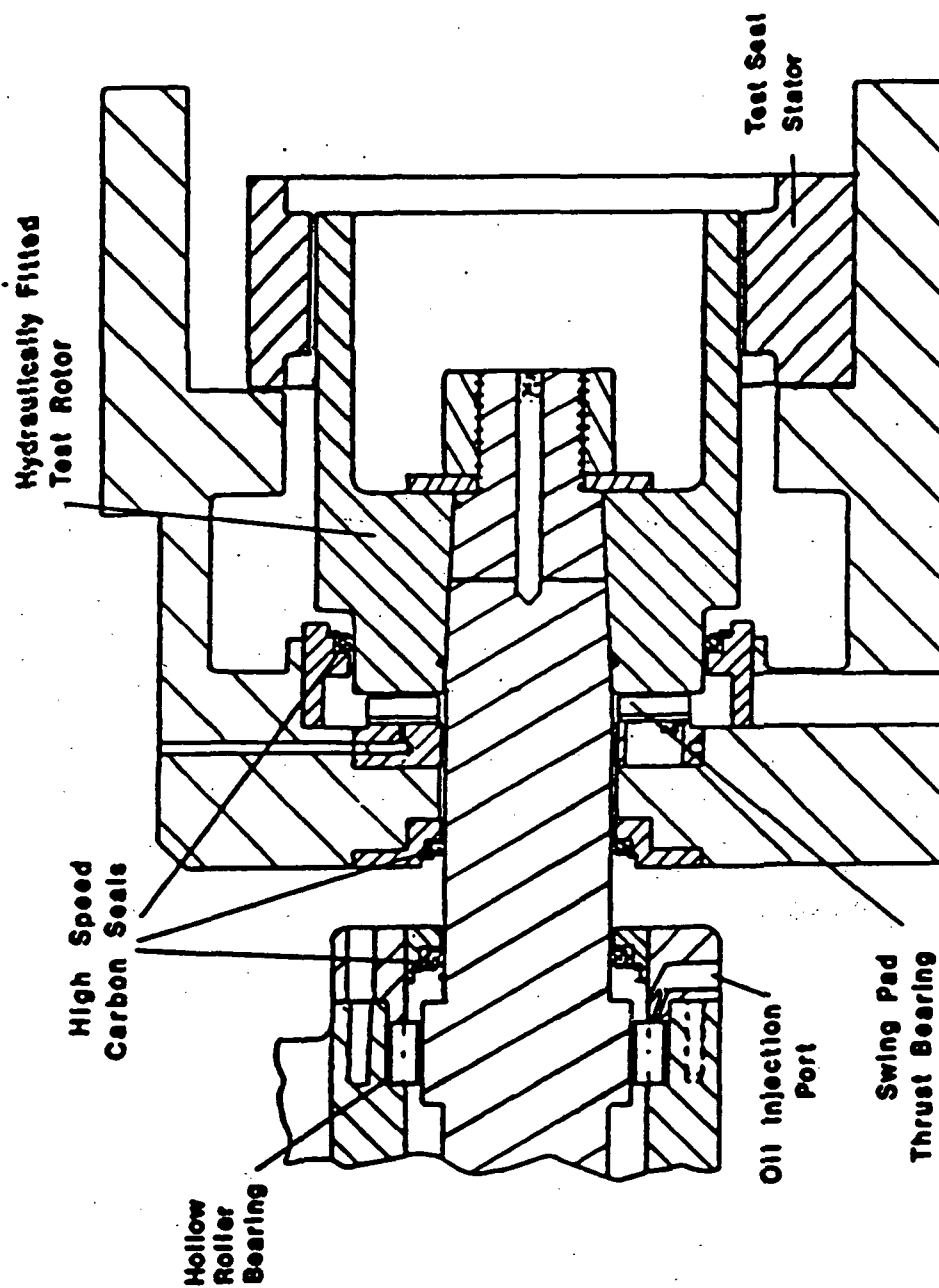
Cross-sectional view of test section showing rotor-shaft assembly.
